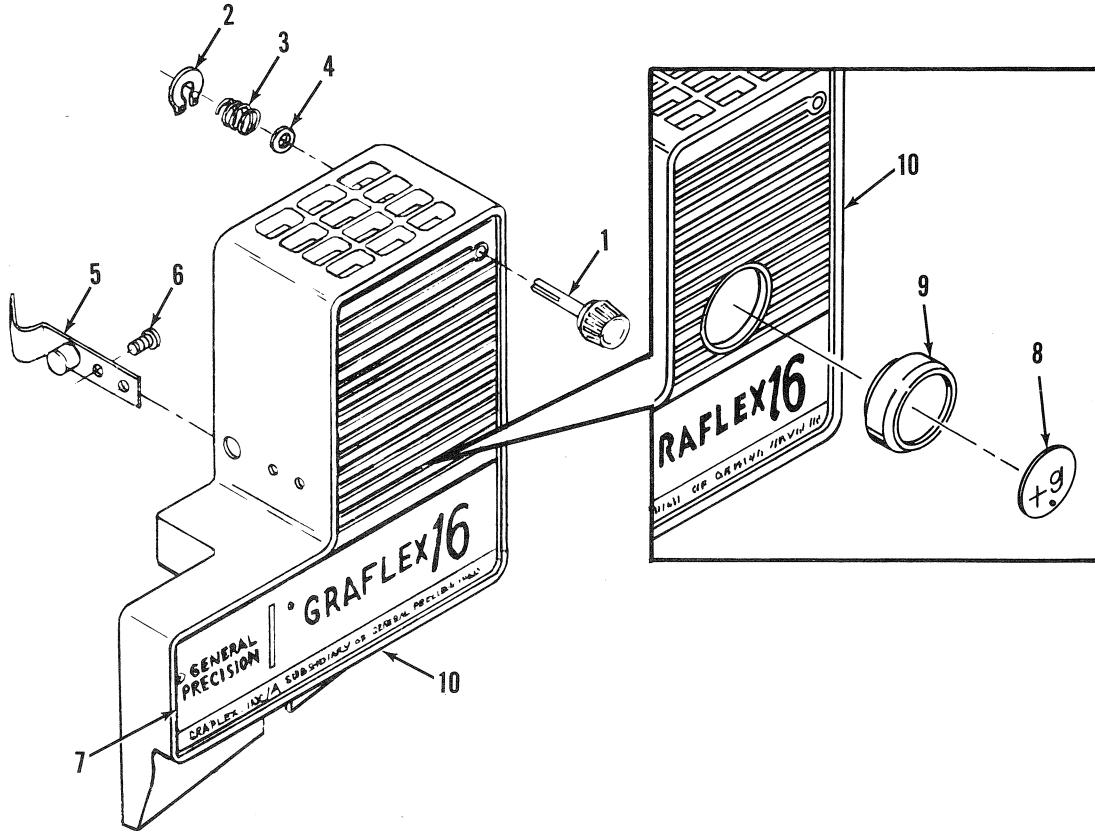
LAMPHOUSE COVER ASSEMBLY
